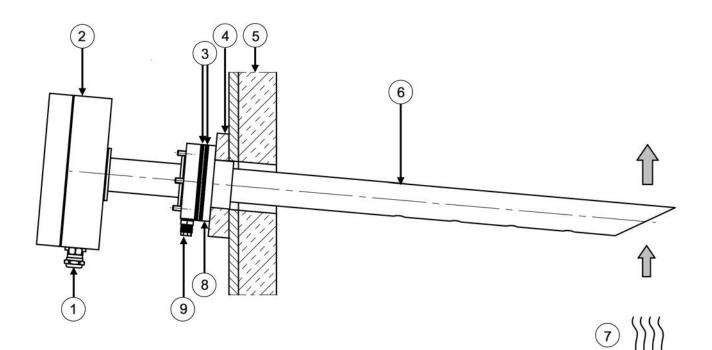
Dimensional drawing Combination Probe KS2DNO_x with GED BASE
